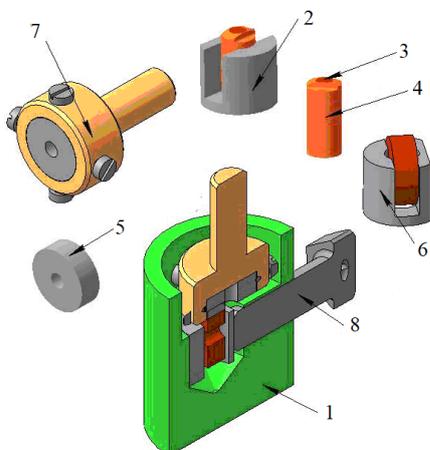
Construction of the friction node for tribotechnical test materials: 1 - friction node; 2 - sample capture for tests; 3 - sample from PCSM; 4 - Finger sample; 5 - counterbody (sample); 6 - capture with a heel sample; 7 - movable clamp with counterbody; 8 - screw-clamp.
